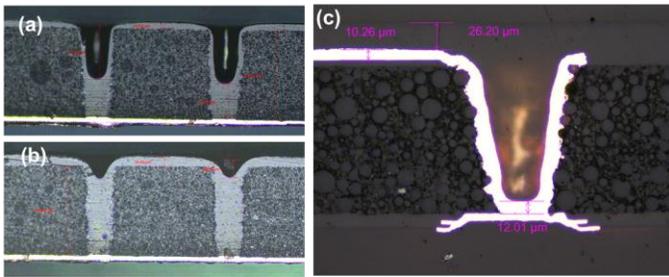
Cross-section of laser drilled through Mold Via with polymer plugging (a&b) polymer plugging using spin coated dielectric with vacuum baking (c) polymer plugging using vacuum lamination dielectric film
